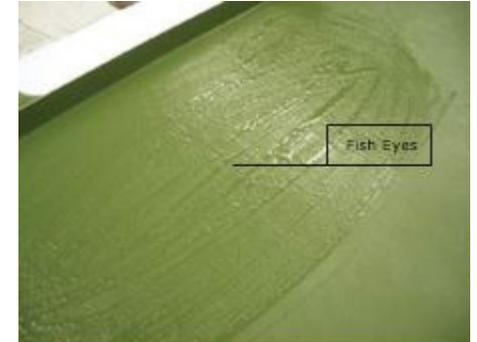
Before wiped over some fish eyes could appear, this is due to the surface residues produced by mould release agent.
